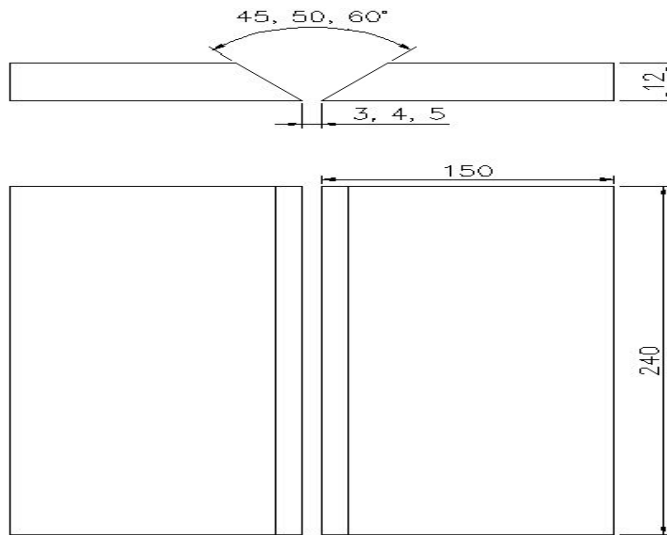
Unconstraint welding joint shape of specimens
